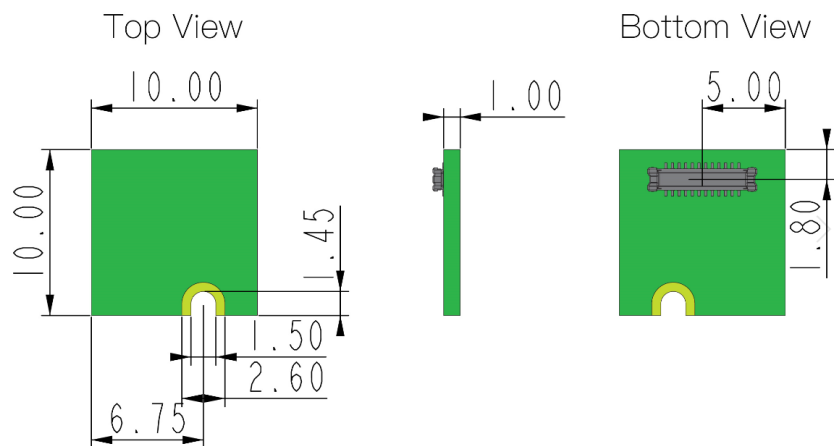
RAK19002 WisBlock Boost Module Mechanic Drawing
